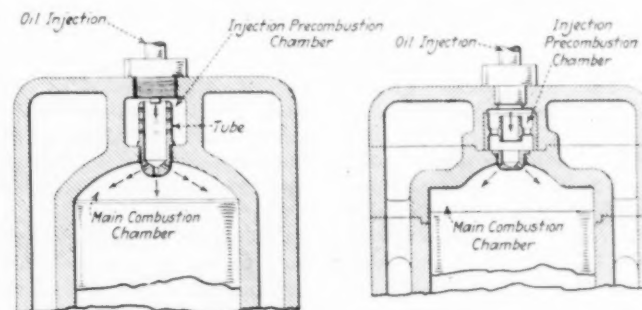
LEISSNER DIVIDED COLD COMBUSTION CHAMBER
